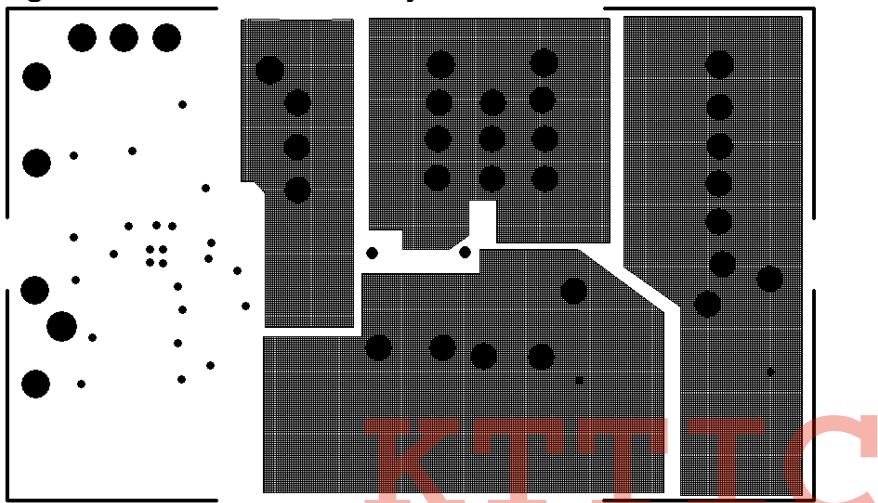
SP6133EB PCB Layout Inner Layer 1 & Inner Layer 2
